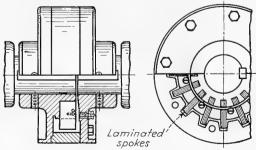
In another design by Brown Engineering Company, a series of laminated spokes transmit power between the two flanges without setting up end thrusts. This type allows free end play. Other advantages are the absorption of torsional shocks, no exposed moving parts, and good balance at all speeds. Wearing parts are replaceable and working parts are protected from dust.
